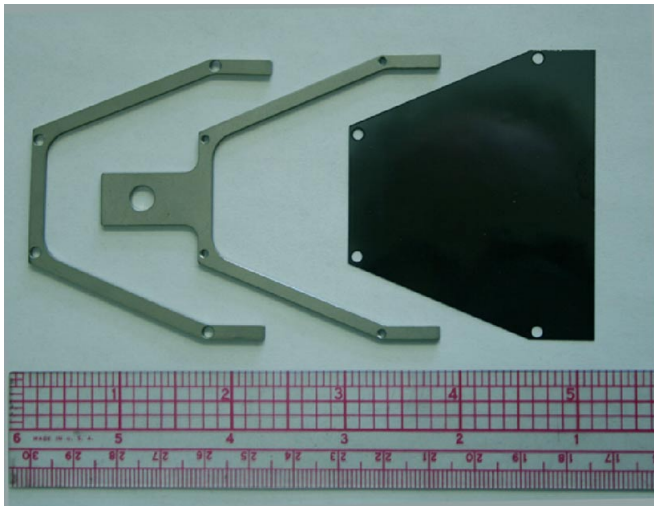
(Color) Photograph of the glassy carbon stripper and foil holder. The clamp shown to the left attaches with pairs of countertightened nuts to studs threaded through the foil holder holes so as to avoid clamping the stripper too tightly to allow for differential expansion during baking. A second clamp (not shown) is used to attach the aluminum foil to the other side of the holder.
